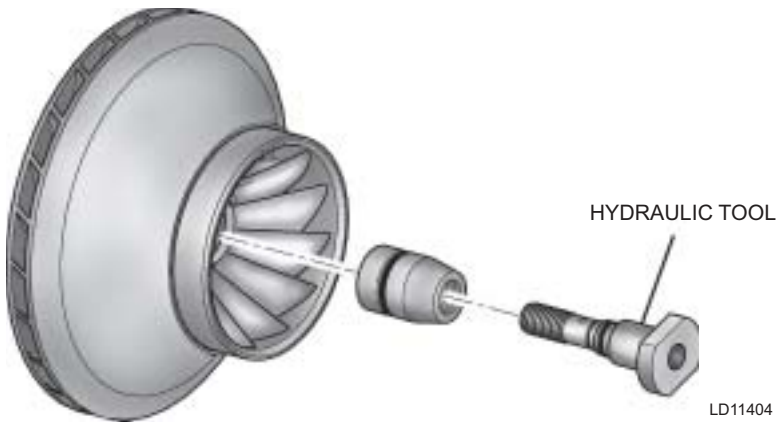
REMOVING THE IMPELLER - HYDRAULIC METHOD (IMPELLER SIZES 36 & 41)
